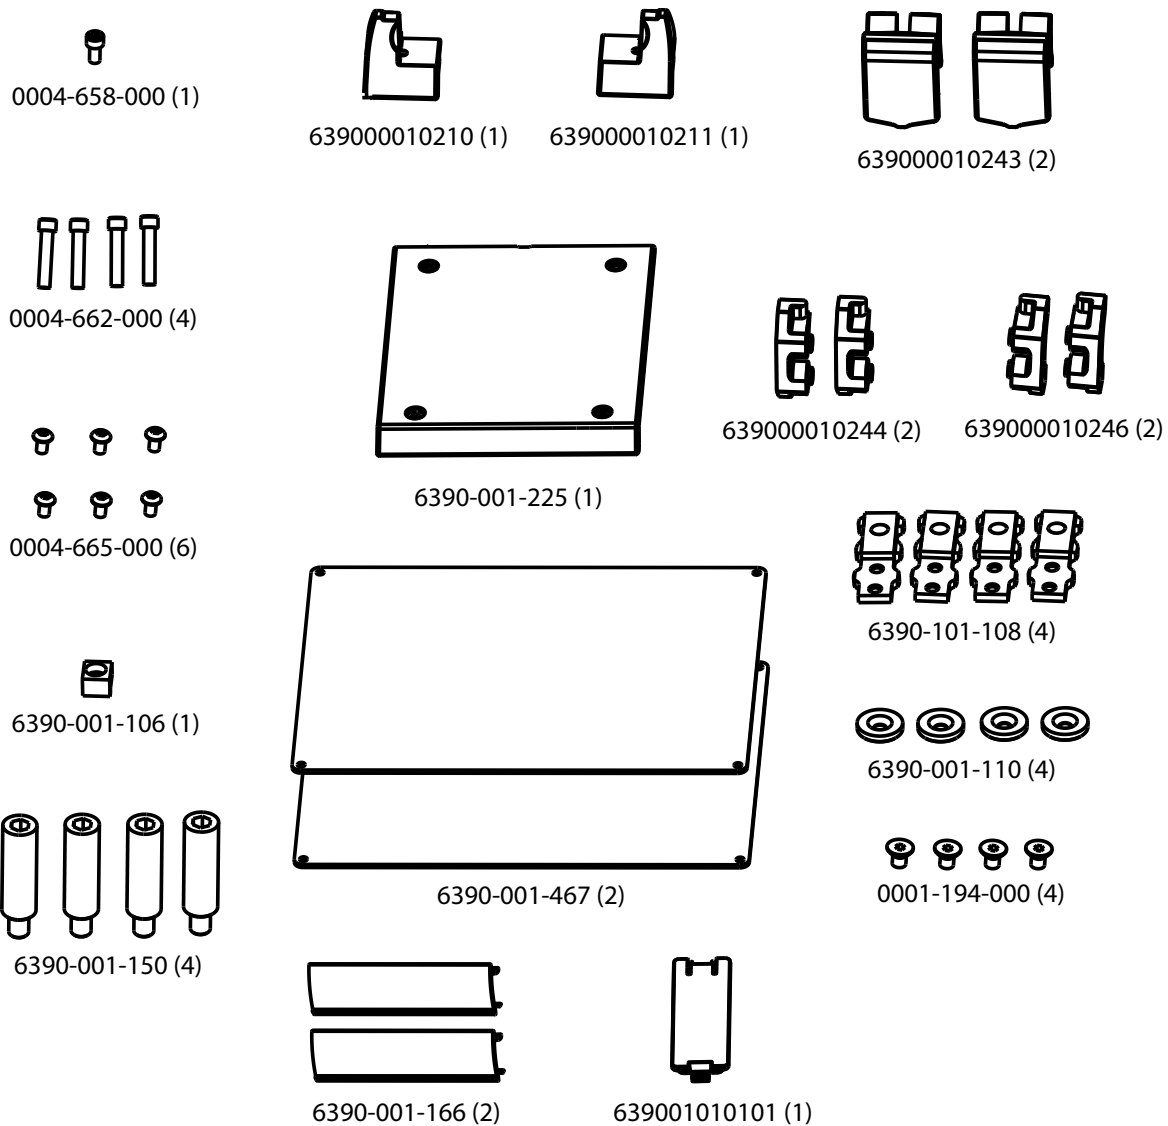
Power-LOAD assembly installation kit components 6390-001-054
